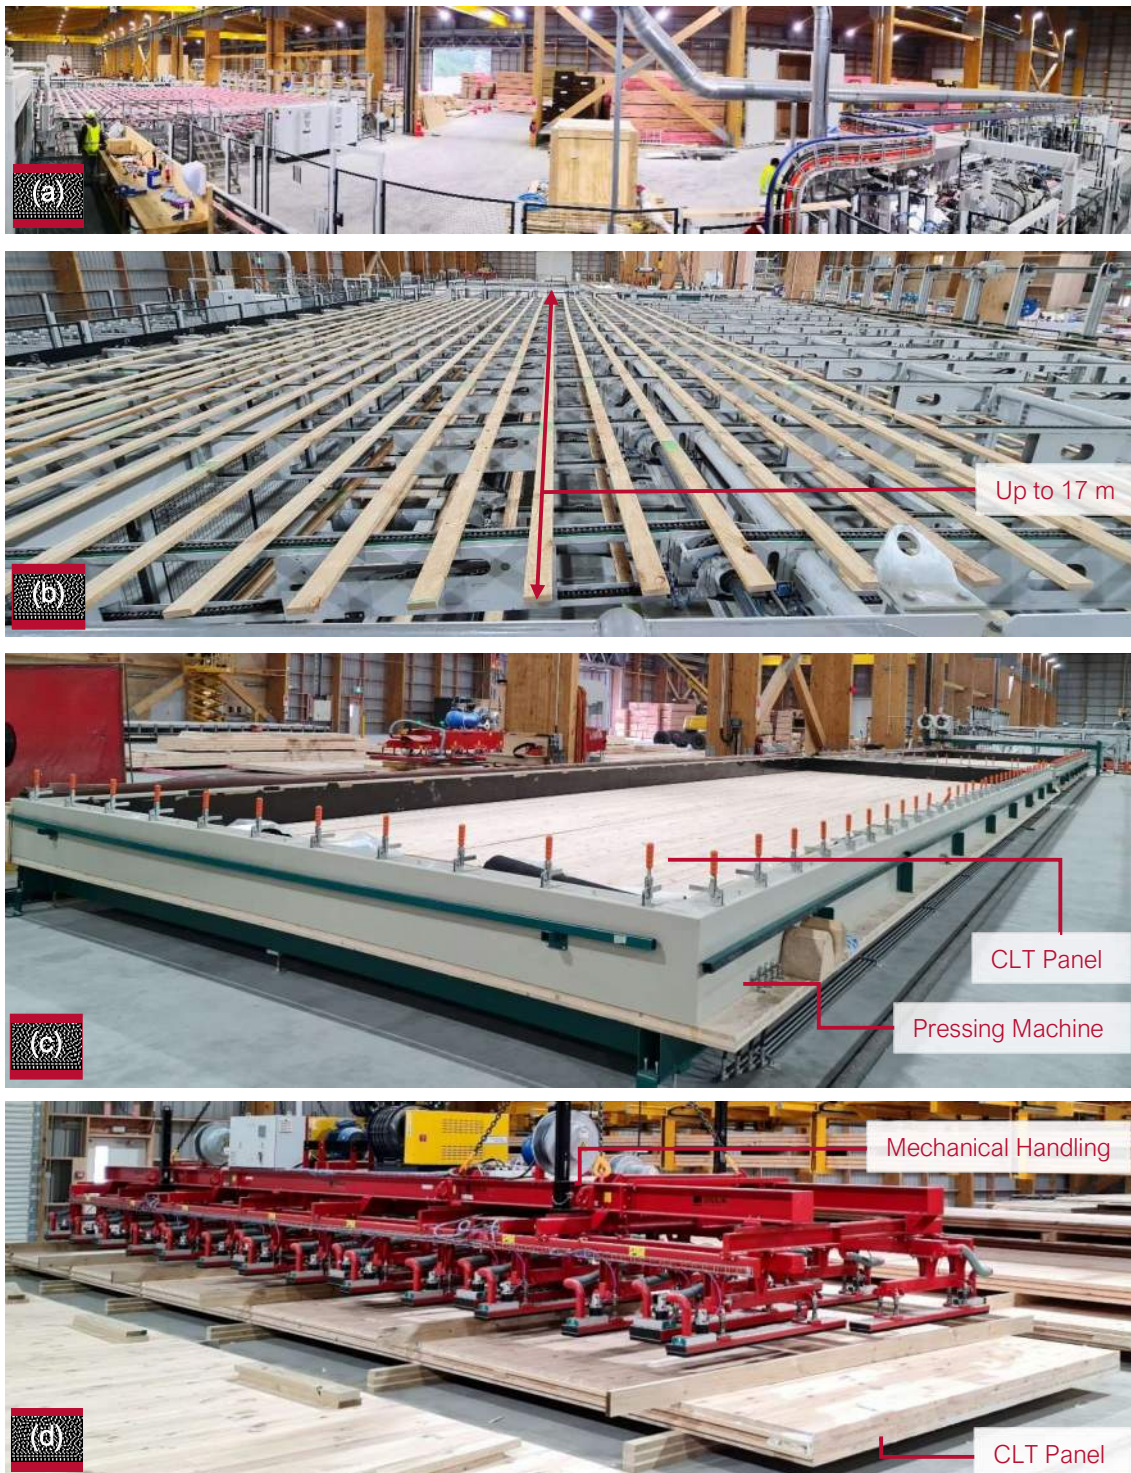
Red Stag's EWP manufacturing facility a) panoramic view of the Red Stag remanufacturing line; (b) 16.5 meter lamella out of the Finger Jointing (FJ) line; (c & d) CLT laminating equipment.
